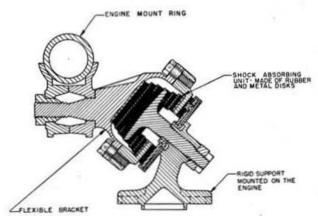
Engine mount incorporating a dynamic-suspension mount bushing.
